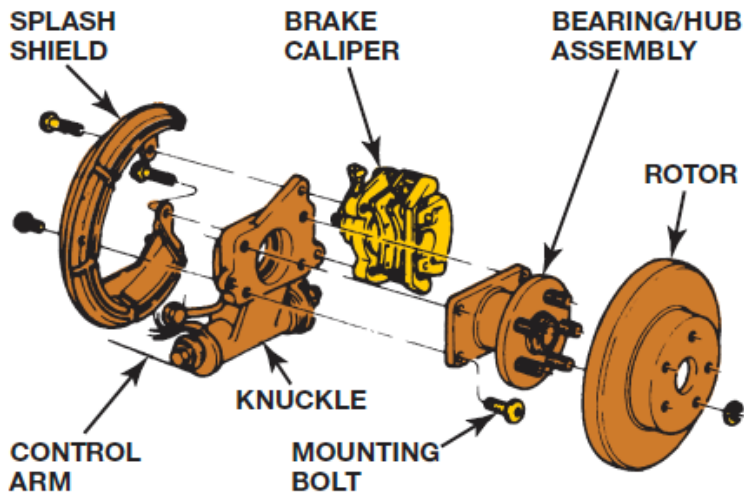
Rear wheel sealed bearing/hub assembly replacement.
